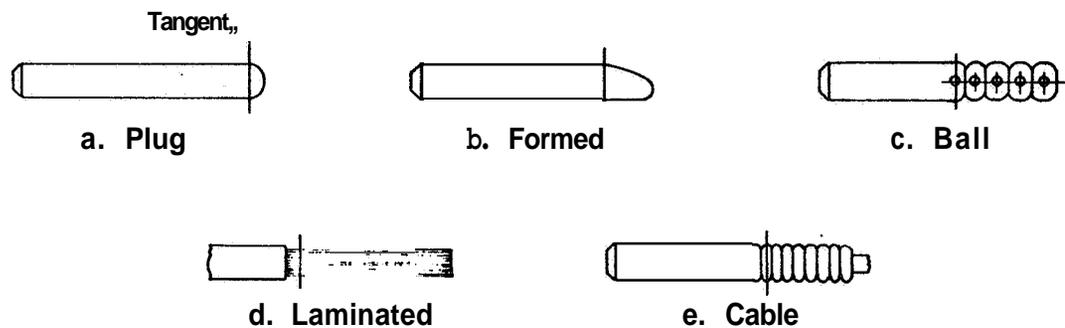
FIVE BASIC TYPES OF MANDRELS USED FOR TUBE BENDING (Ref. 120)
